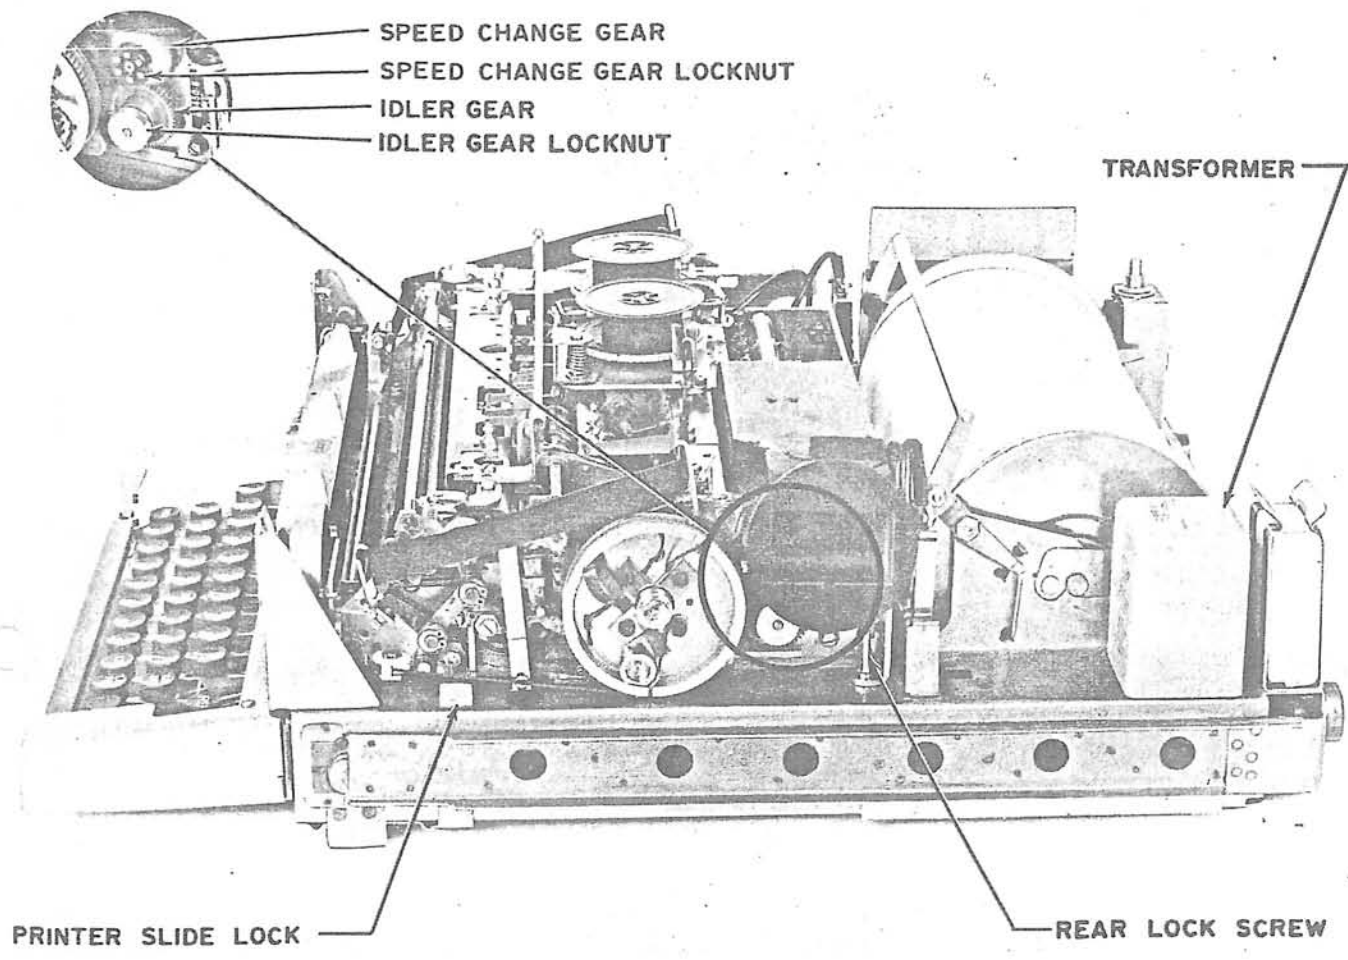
Right Side View of Teletypewriter Set AN/UGC-41, Case Removed
